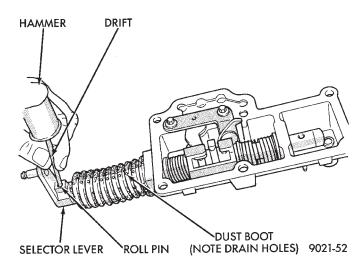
Remove or Install Roll Pin and Lever Roll pin must be flush with top of lever.
